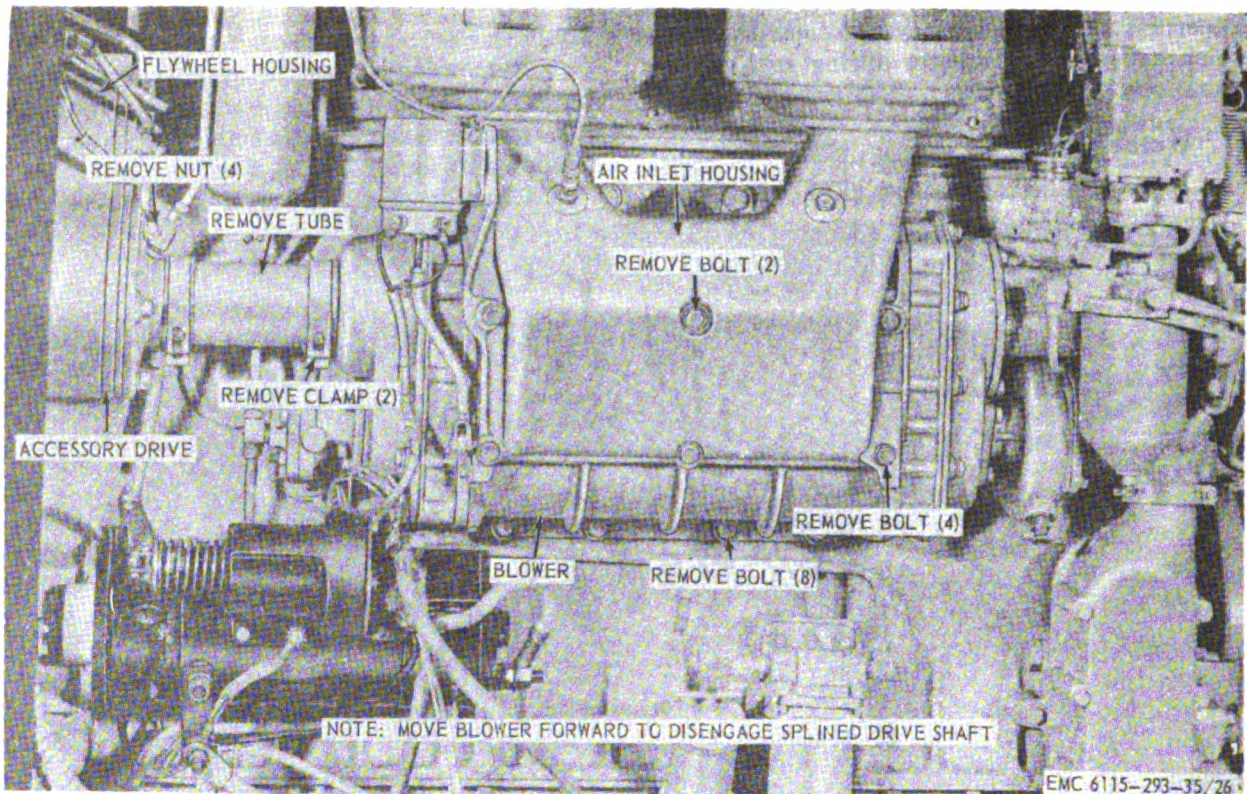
Air inlet housing, blower, and accessory drive, removal and installation.
